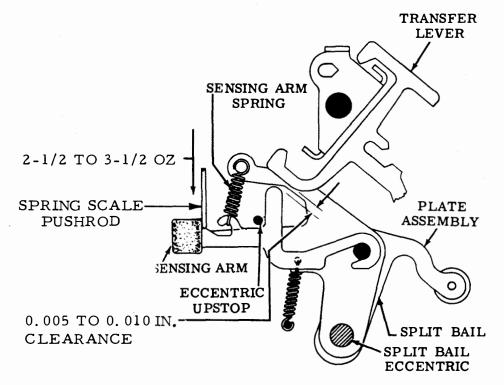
Contact Swinger - Sensing Arm Clearance
